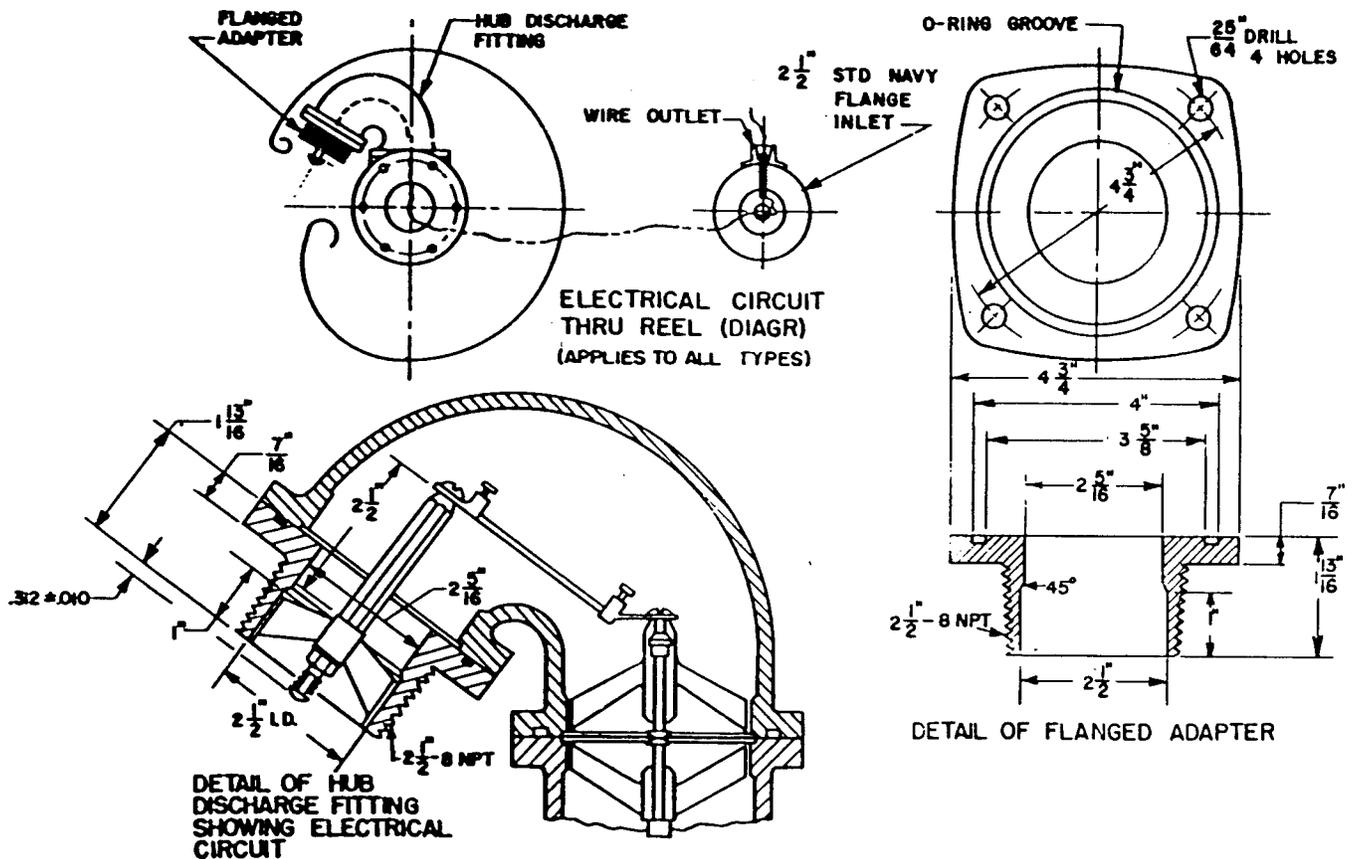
Discharge Fitting and Adapter Details for Type 1 and 3, 2 1/2-in. (65-mm) Collapsible Reels
